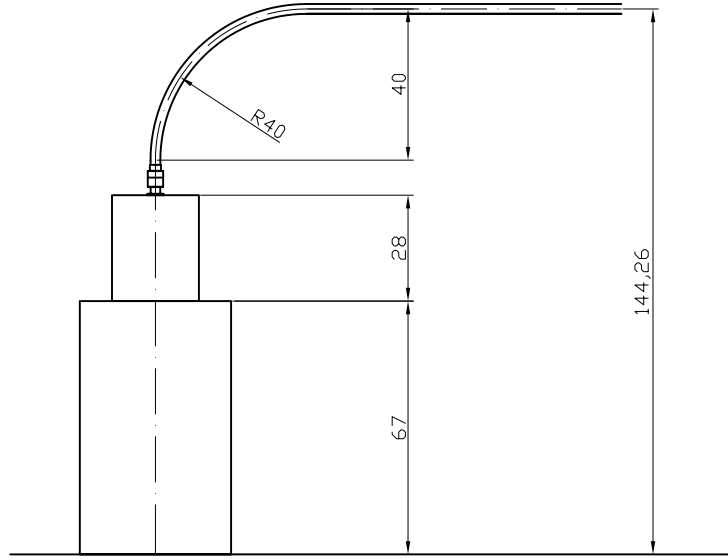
View of the capacitor, spark-gap and coaxial cable assembly with its relative bending radius (dimensions in cm).
